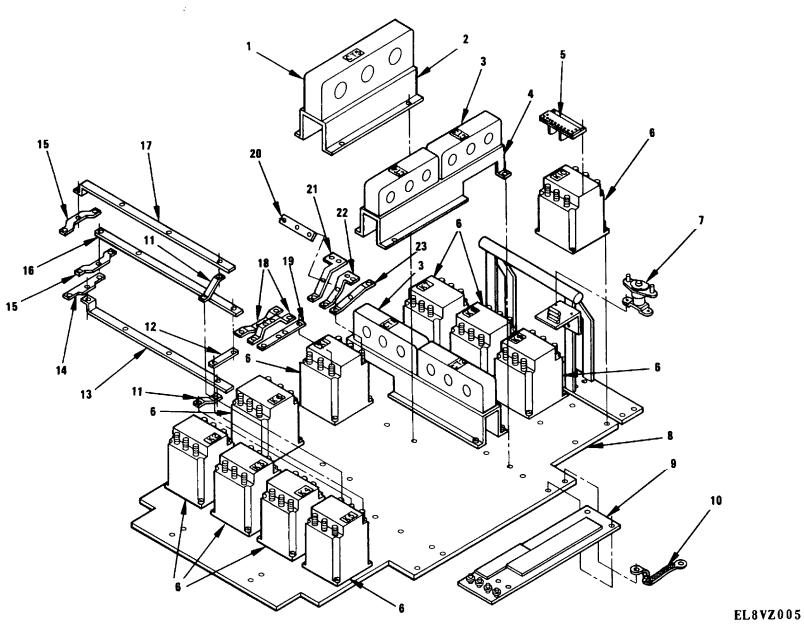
Power Control Assembly and Wiring Harness (Sheet 1 of 2).
